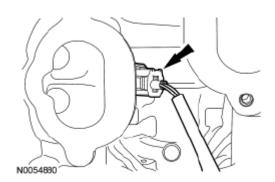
Locating LH CMP Sensor Courtesy of FORD MOTOR CO.
